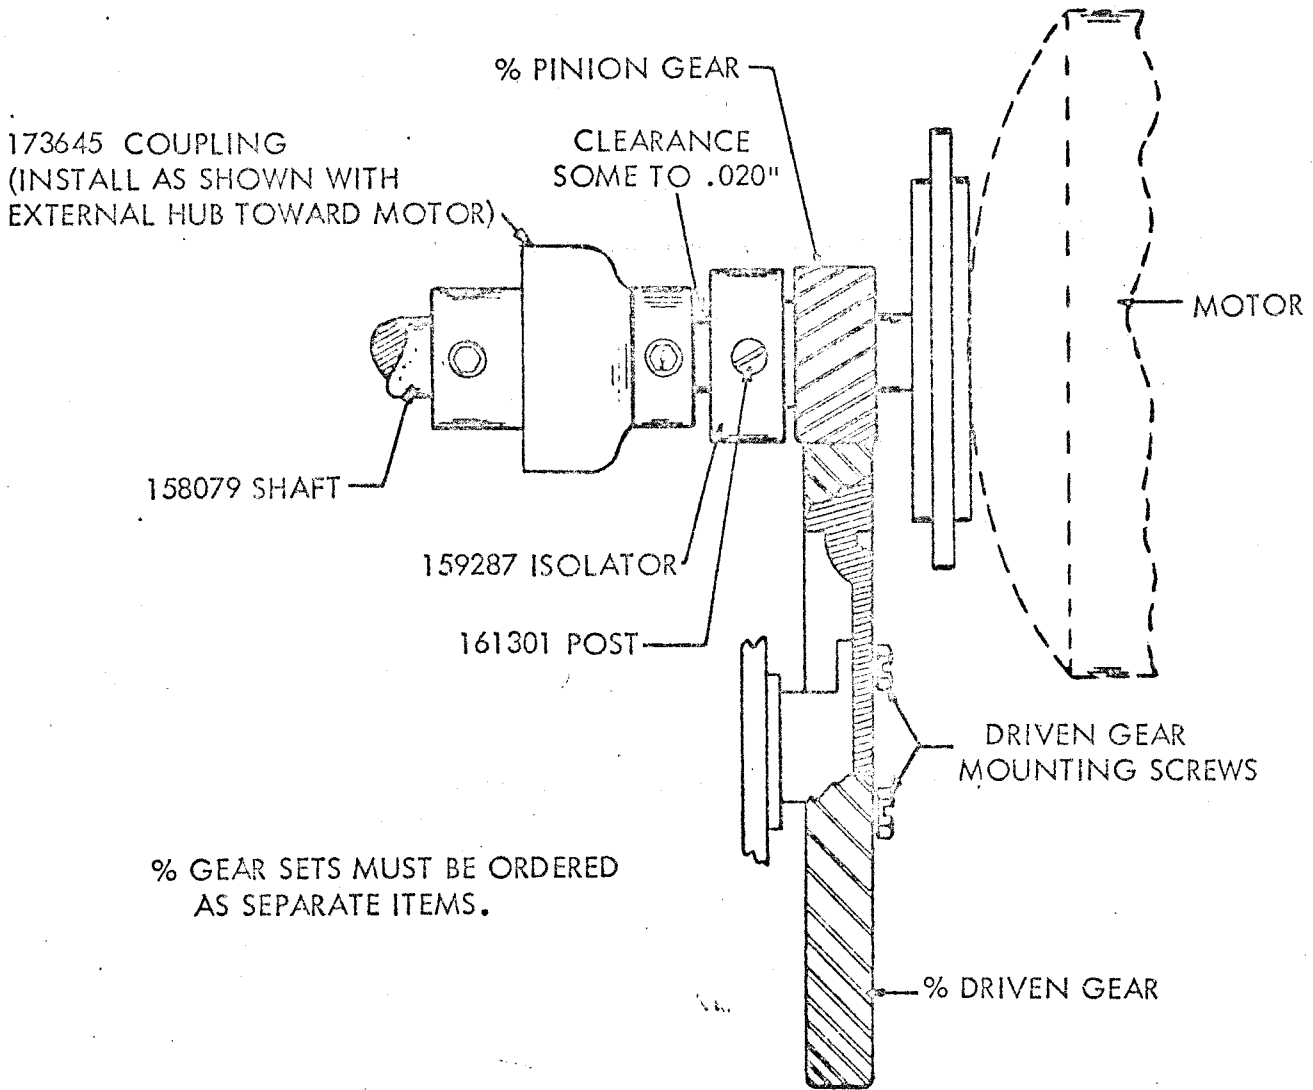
INSTALLATION OF MOTOR PINION, GEAR AND FLEXIBLE COUPLING
